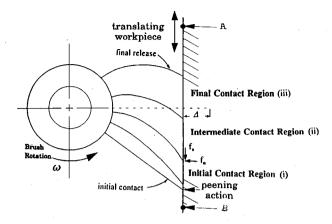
Geometry and force system of circular brush in contact with flat workpart surface.
